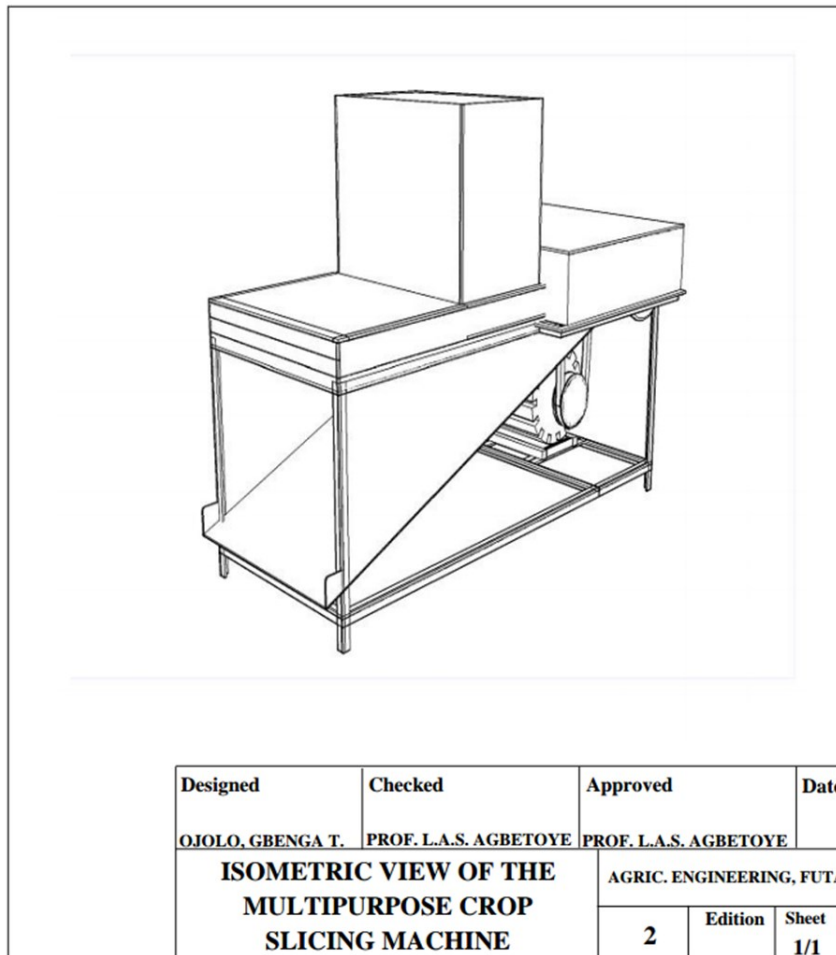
Isometric drawing of the multipurpose crop slicing machine
